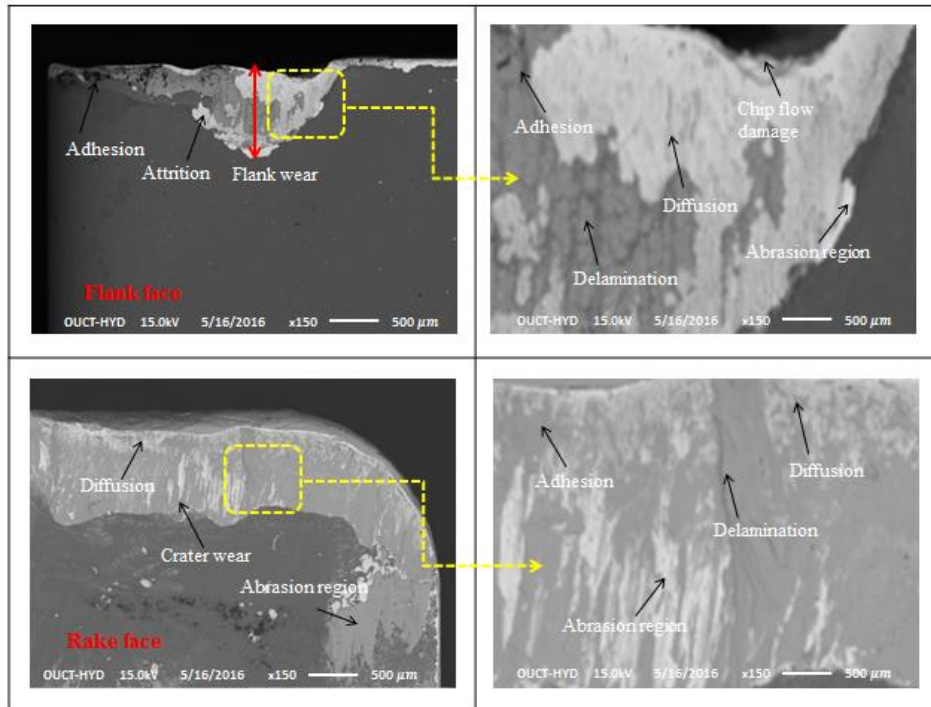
SEM images of cutting tool in MQSL machining condition at cutting speed 100 m/min
